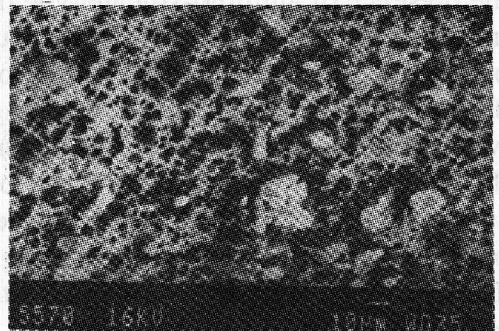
SEM fractograph of wire failed during operation, exhibiting dimples and indicating ductile fracture. Inclusions can also be observed.
